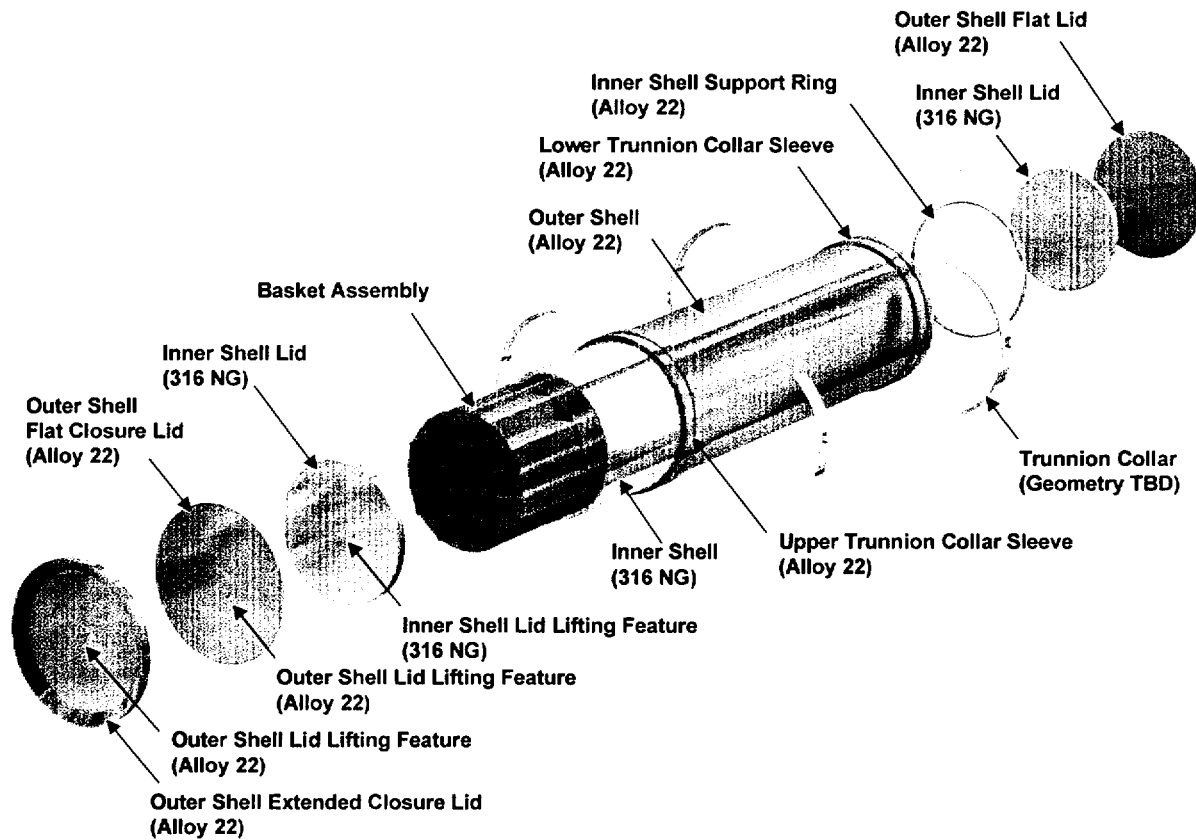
21-PWR Waste Package Assembly Configuration
